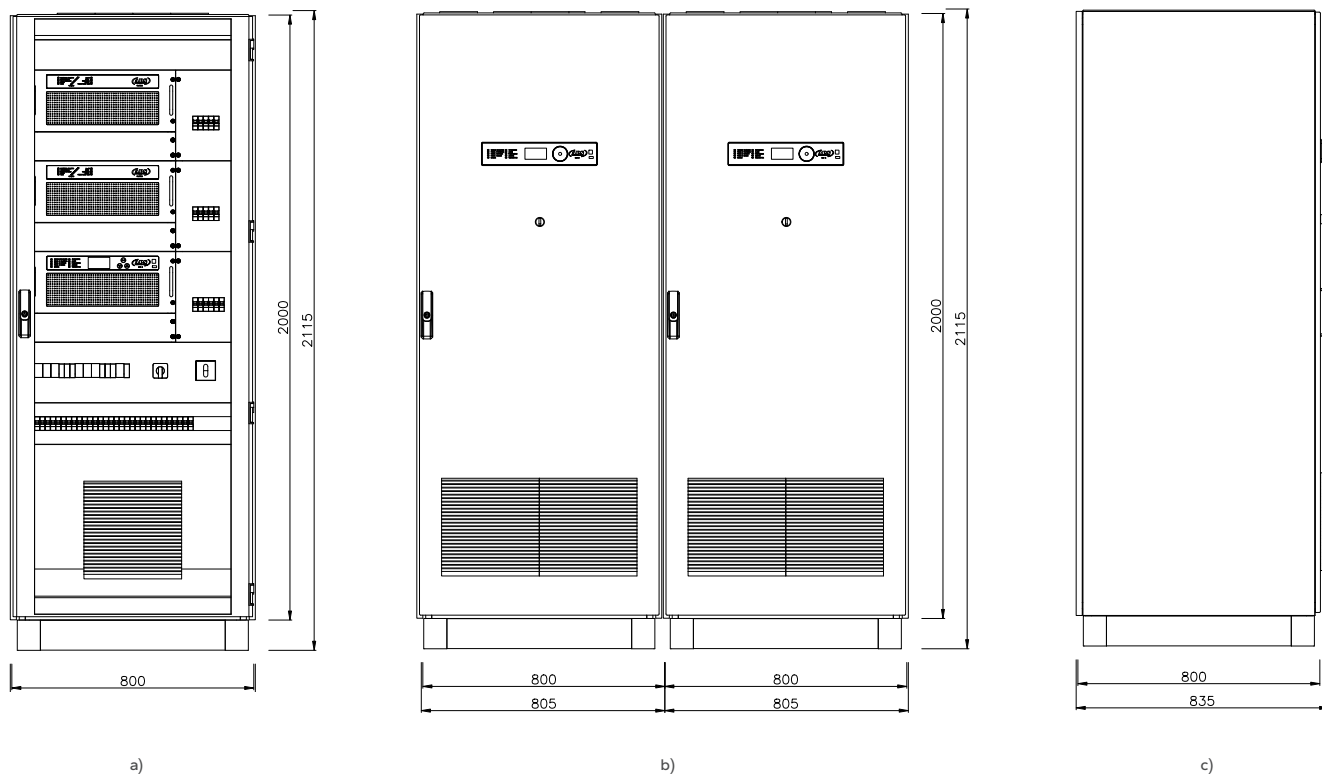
Views with dimensions of the BFIpz / BFip type inverter cabinet:
